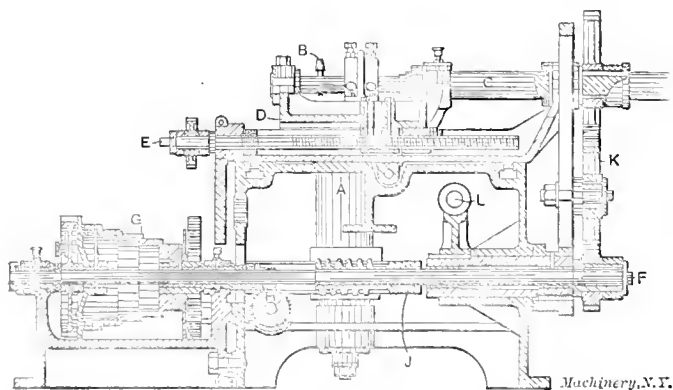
Vertical Section through Wellwork Worm-wheel Generating Machine.
